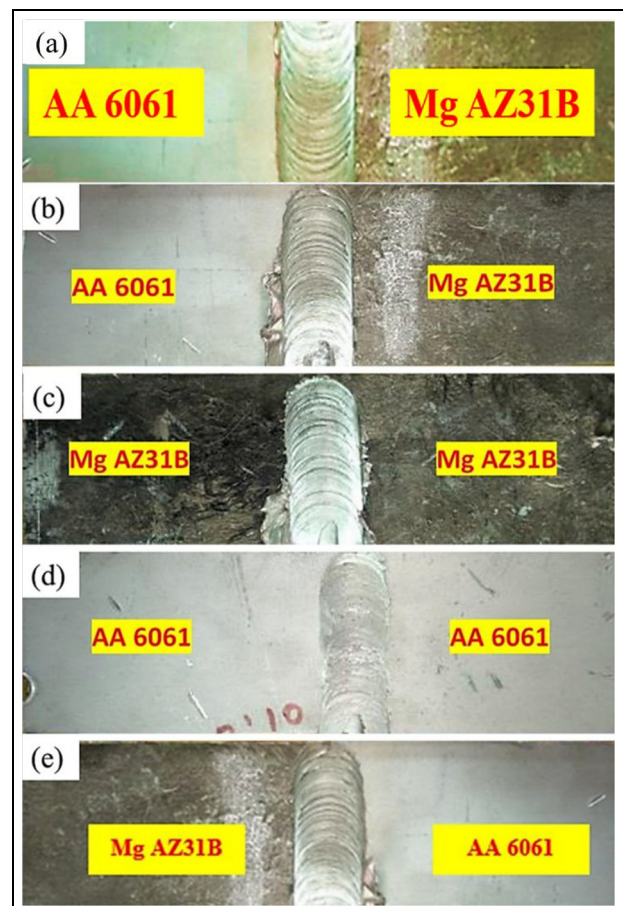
Friction stir welded joints: (a) AA 6062 and Mg AZ31B (feed 3 mm/min), (b) AA 6062 and Mg AZ31B (feed 8 mm/min), (c) Mg AZ31B-Mg AZ31B, (d) AA 6061-AA 6061, and (e) Mg AZ31B-AA 6061.
